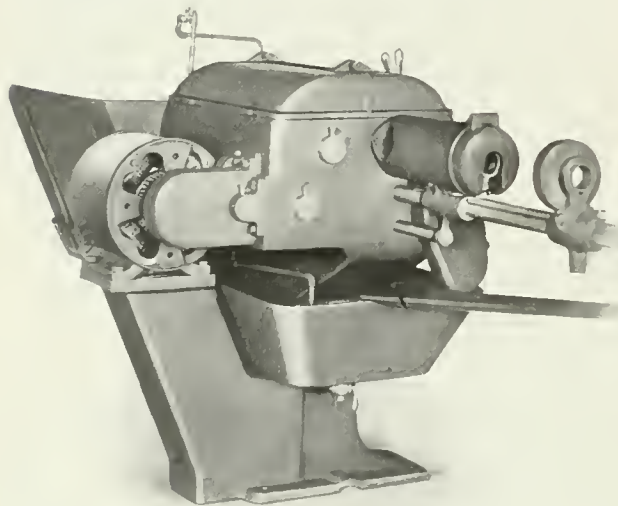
Rear View of Bardons & Oliver Machine, showing Motor Drive
